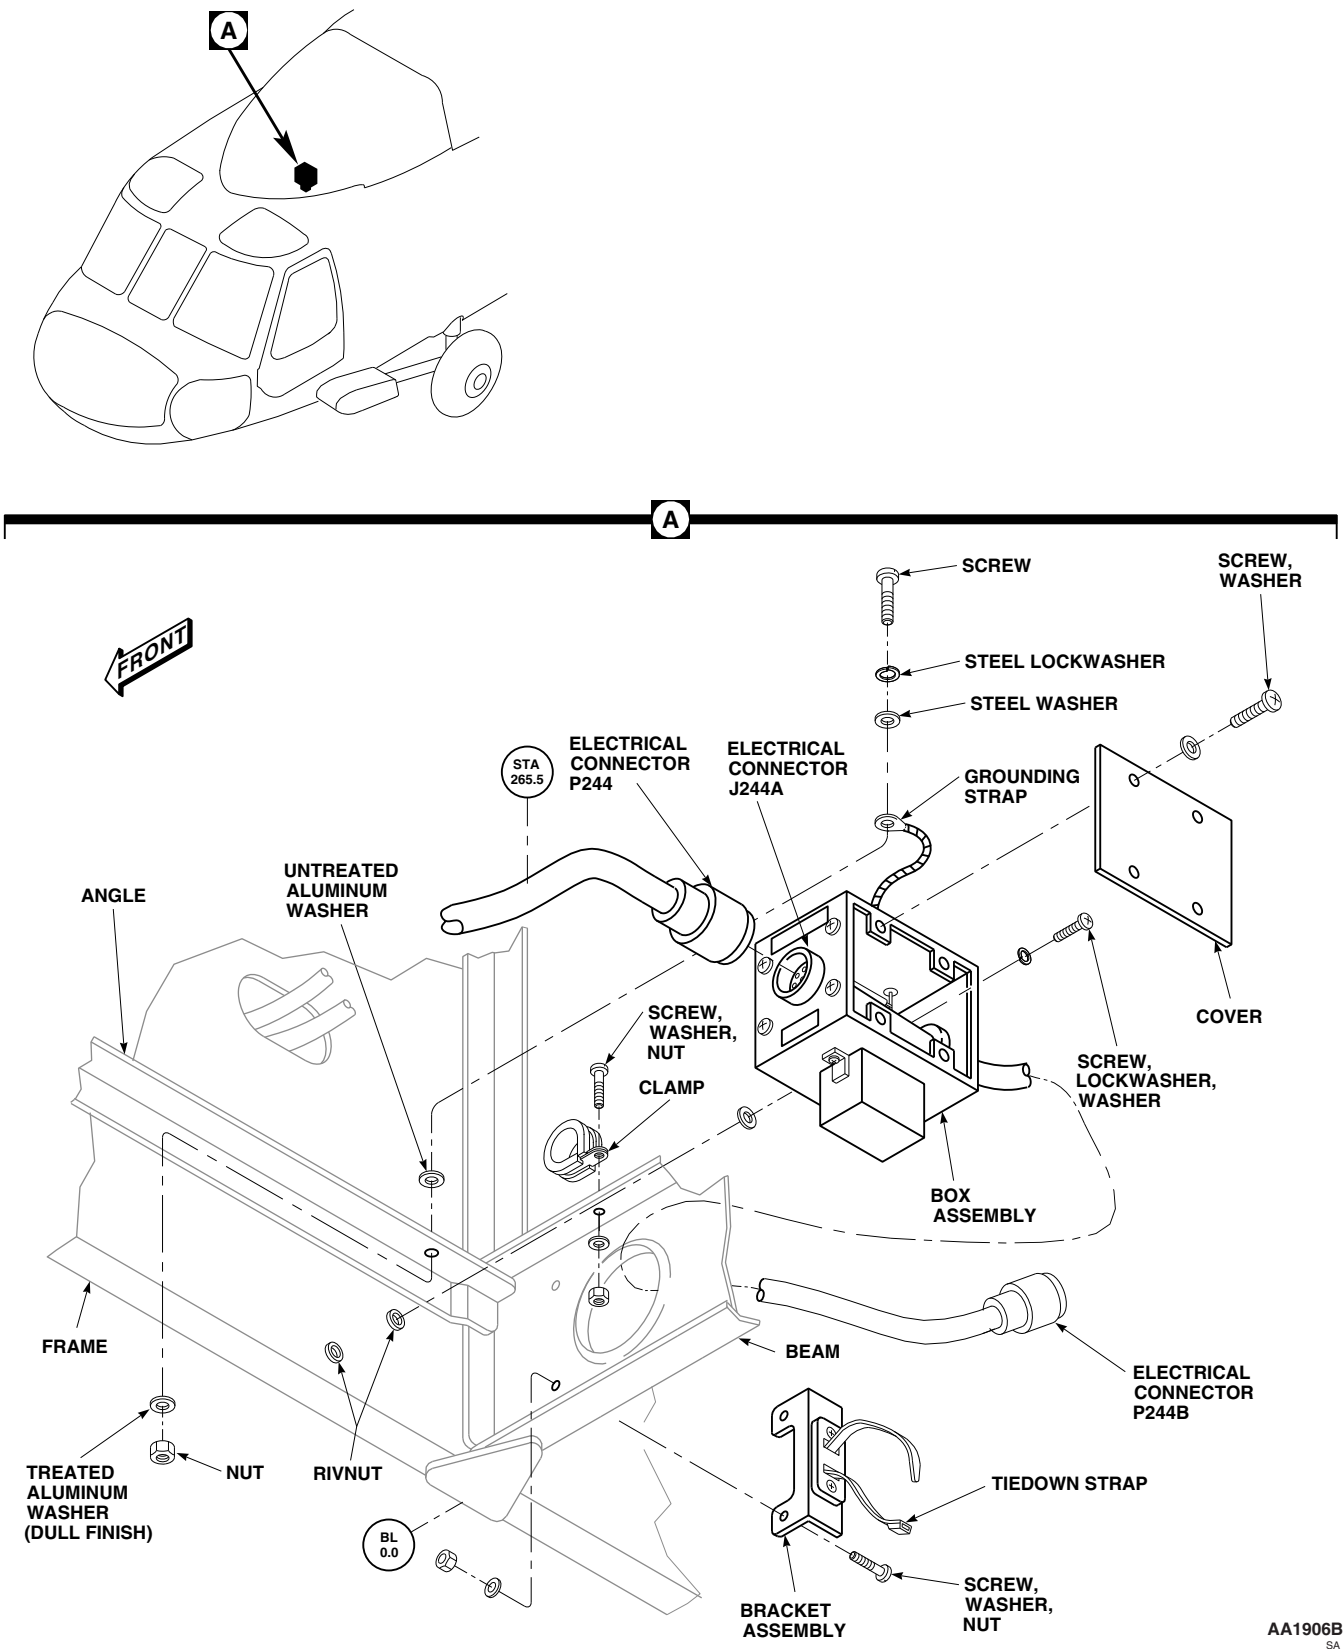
INSTALL SECOND ACCUMULATOR BOX ASSEMBLY
